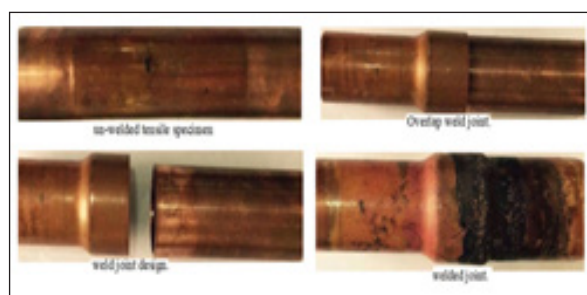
Oxyacetylene Pipe Welding Process
